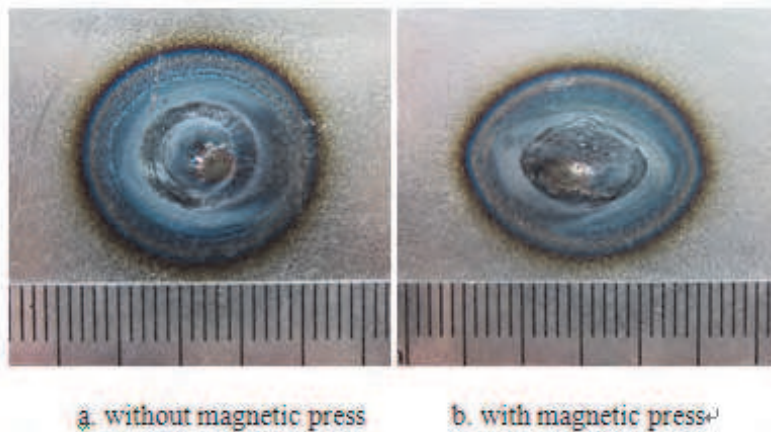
Welding spot of magnetic pressed arc or not pressed.
